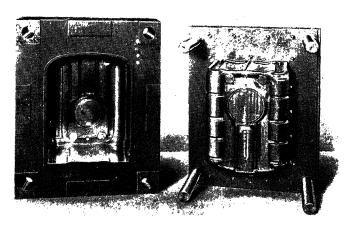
Dies for radio cabinet. Such a die would be used to mold a cabinet in plastics. (Keller.)
